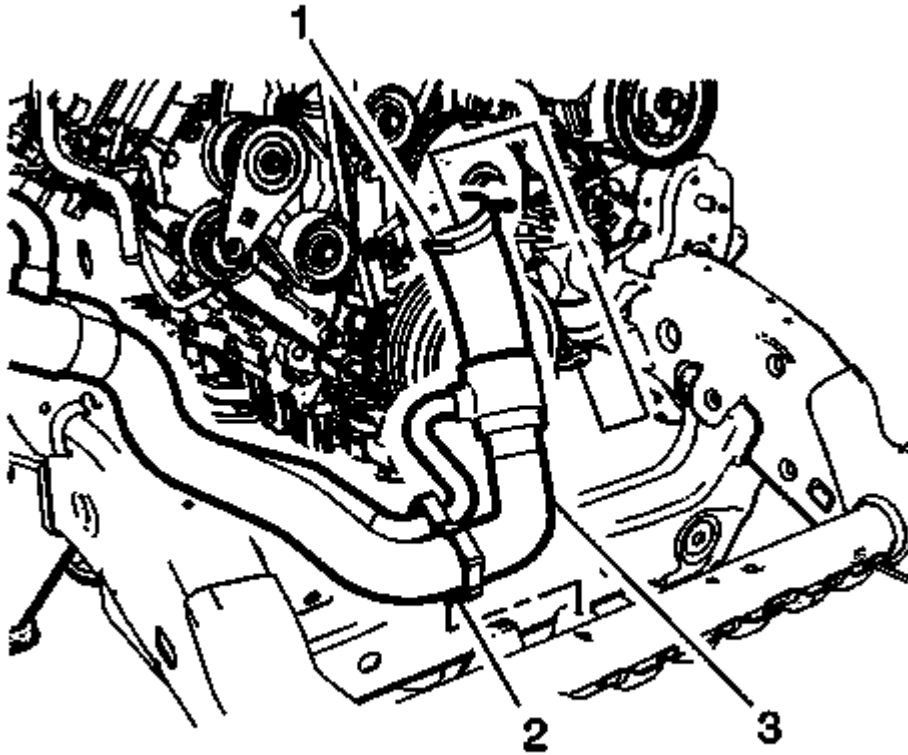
Radiator Outlet Hose, Clamp And Clip Retainers
